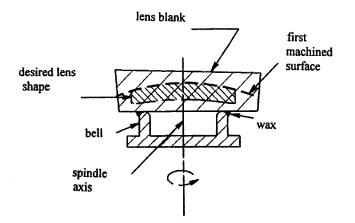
A crystalline lens blank mounted on the bell of a SPDT machine spindle for shaping and finishing the first lens surface.
